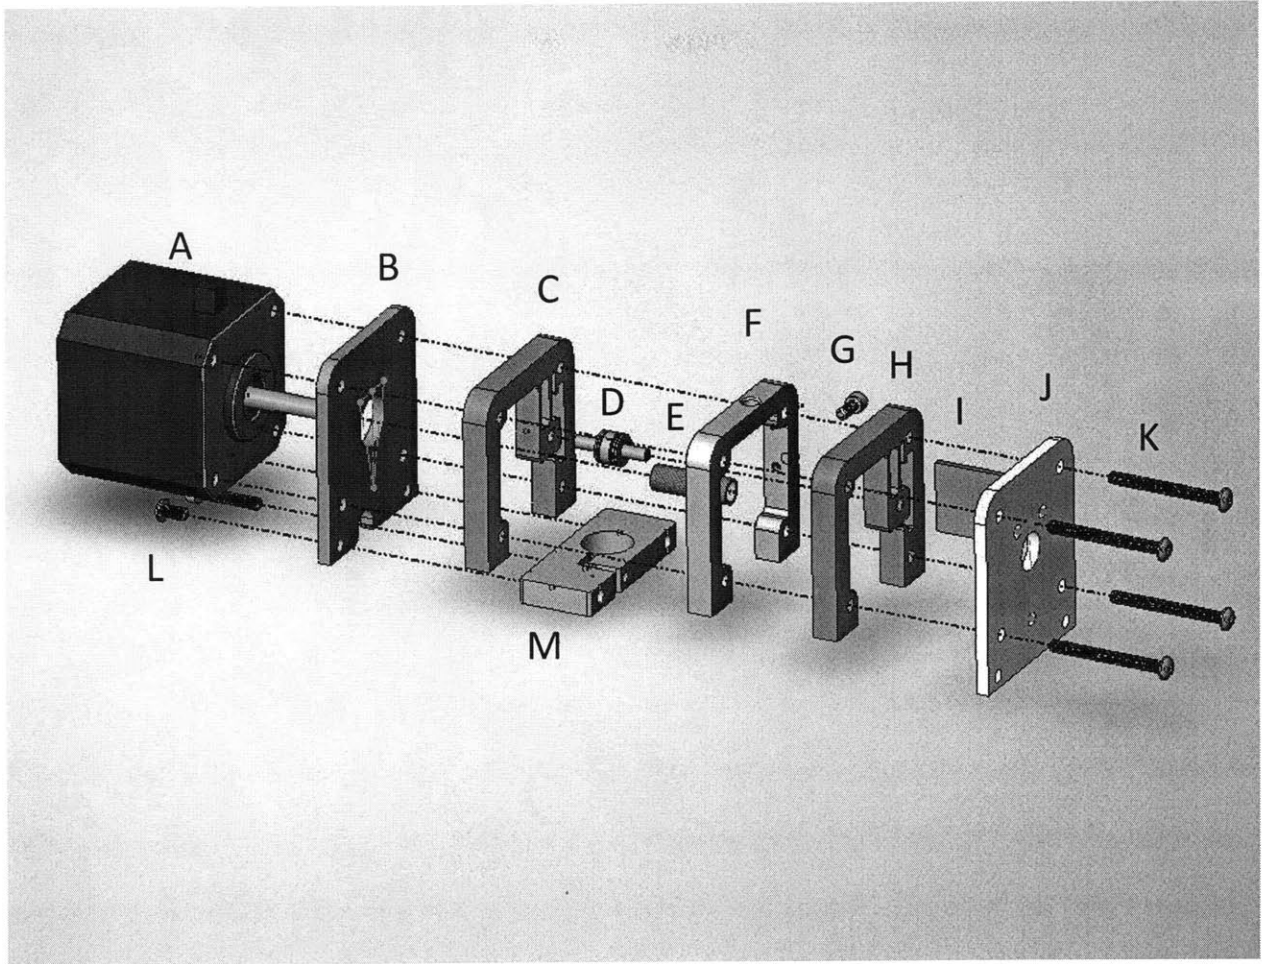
Exploded view of extruder body assembly. The assembly mounts to the stepper motor, making a compact design.
